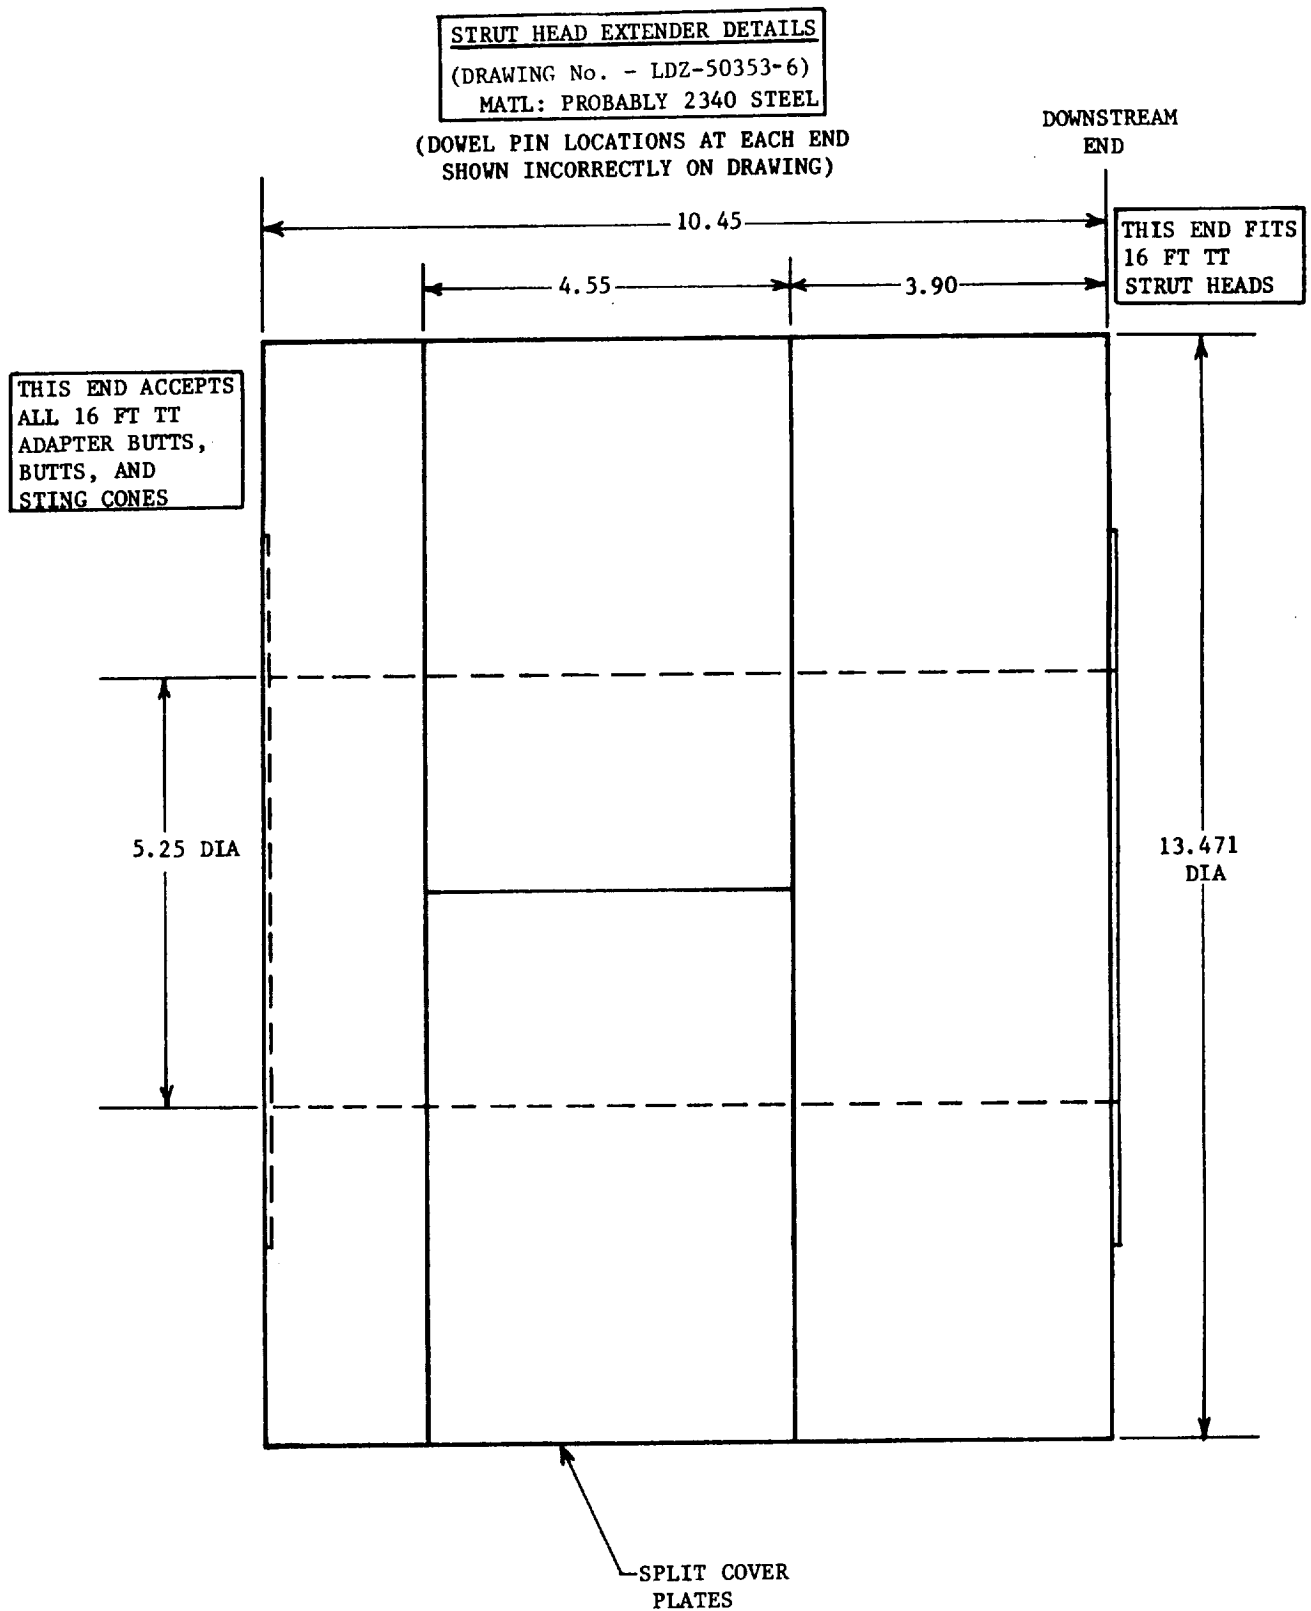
Sketch of strut head extender. (All dimensions are in inches unless otherwise indicated.)
